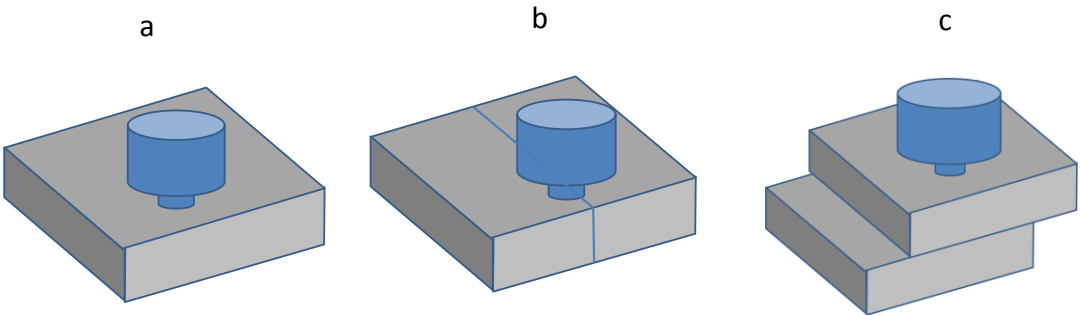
Different FSW configurations. a) Bead on plate (BOP) weld, b) a butt weld and c) a lap weld. (Author’s own schematic).
